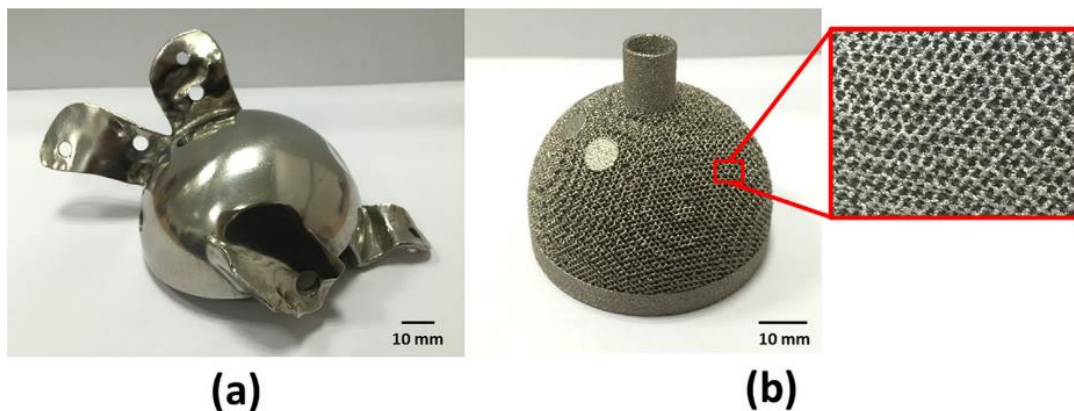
Metallic implants produced by additive manufacturing: a) hip joint and b) as-built acetabular cup [12].
